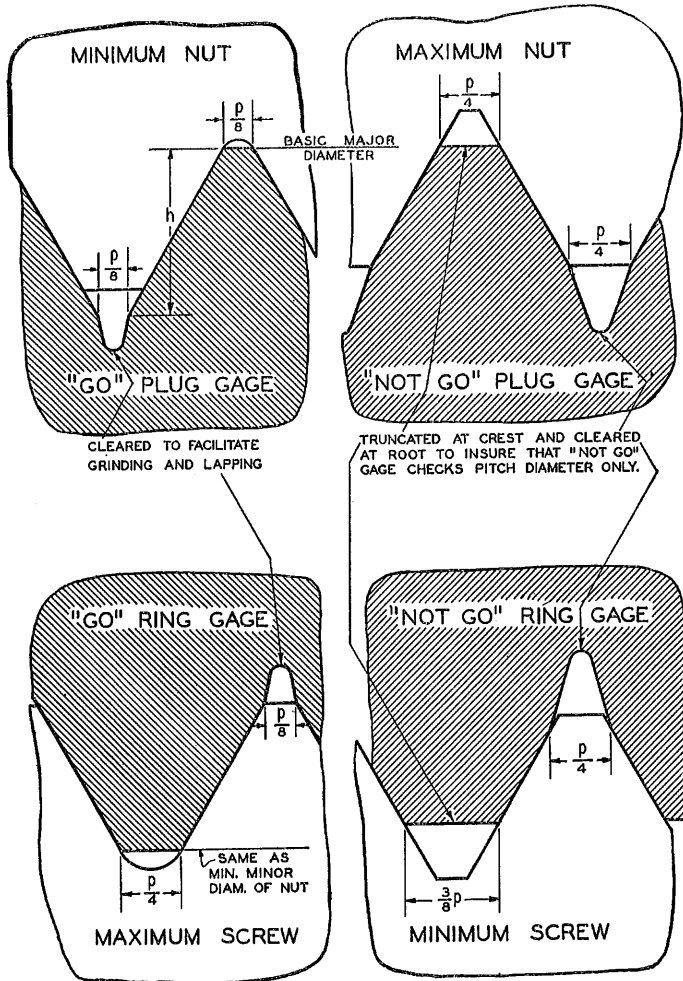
Thread form of "go" and "not go" thread plug and ring gages.
